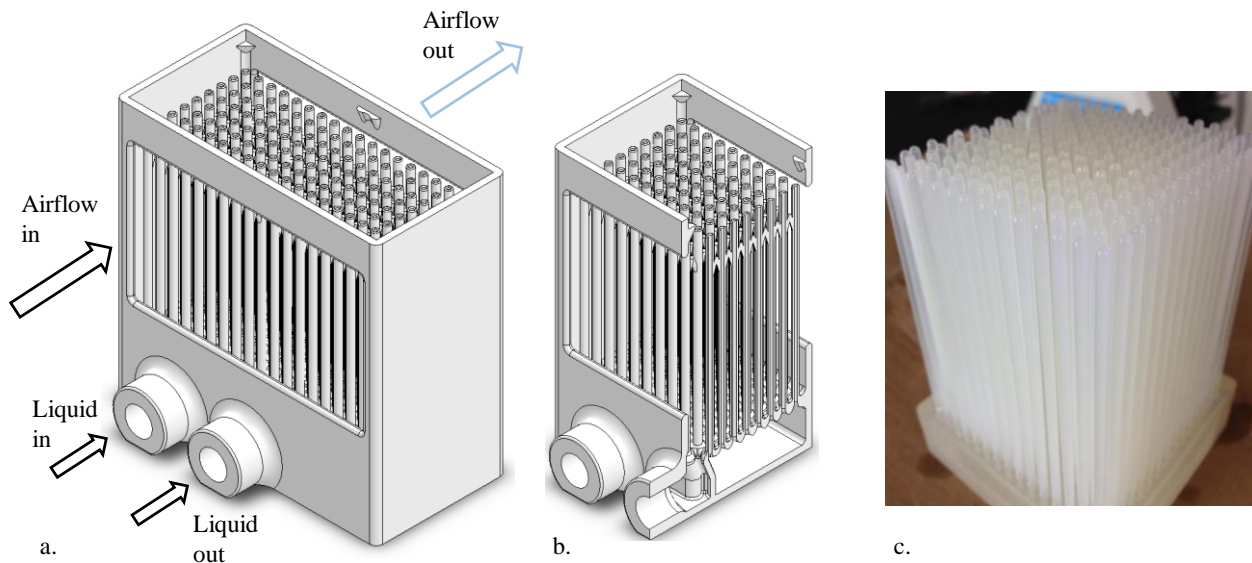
3-D printed hollow tube vertical up-flow contactor where the liquid is forced up parallel hollow tube passageways from a single manifold (reservoir). The opening at the top of each tube allows liquid to form a meniscus which uniformly pours over the side of the outer tube walls forming a stable uniform thin film. The film thickness may be controlled by the flow rate of the liquid from the pump: a. Solid model perspective highlighting fluid flow paths, b. sectional view showing fill manifold below, and c. image of the device in operation. Nearly hemispherical menisci are visible at the top of each hollow tube.
